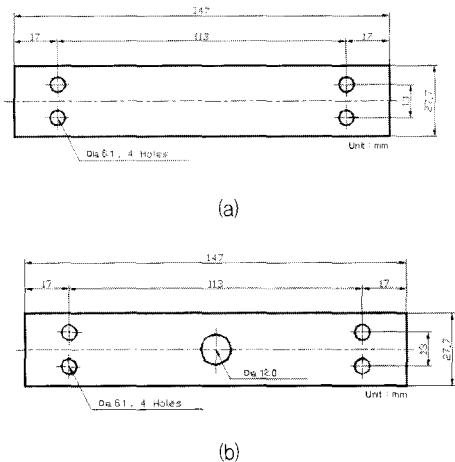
Finite width uniaxially loaded tensile plate. (a) Rectangular steel plate, (b) rectangular steel plate containing a circular hole (thickness of both plates is 1.15 mm)
